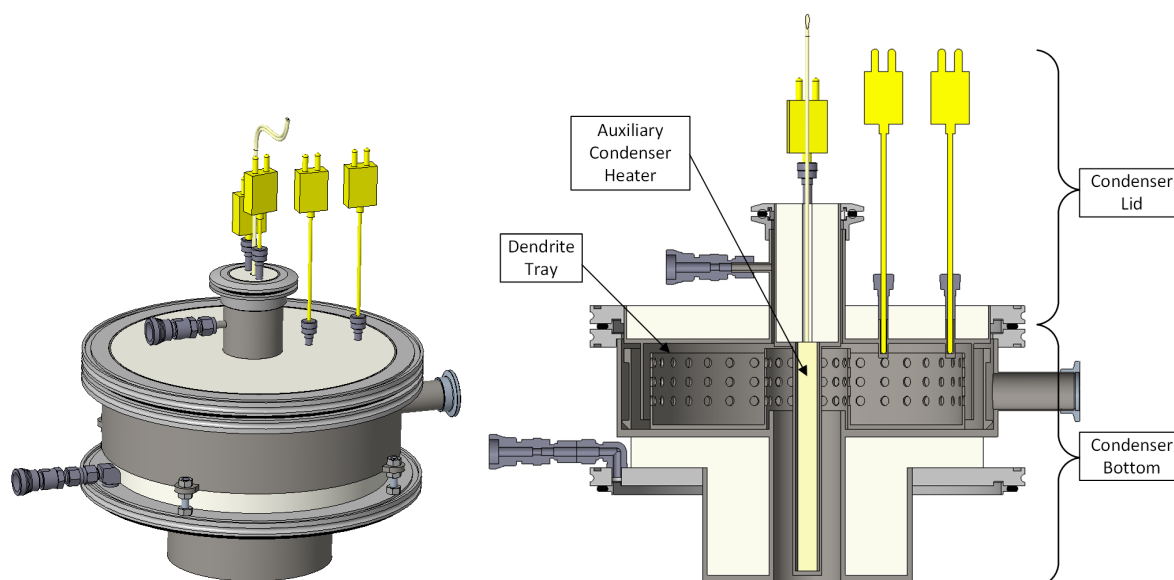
Condenser Layout – Isometric view (left) and section view (right)
